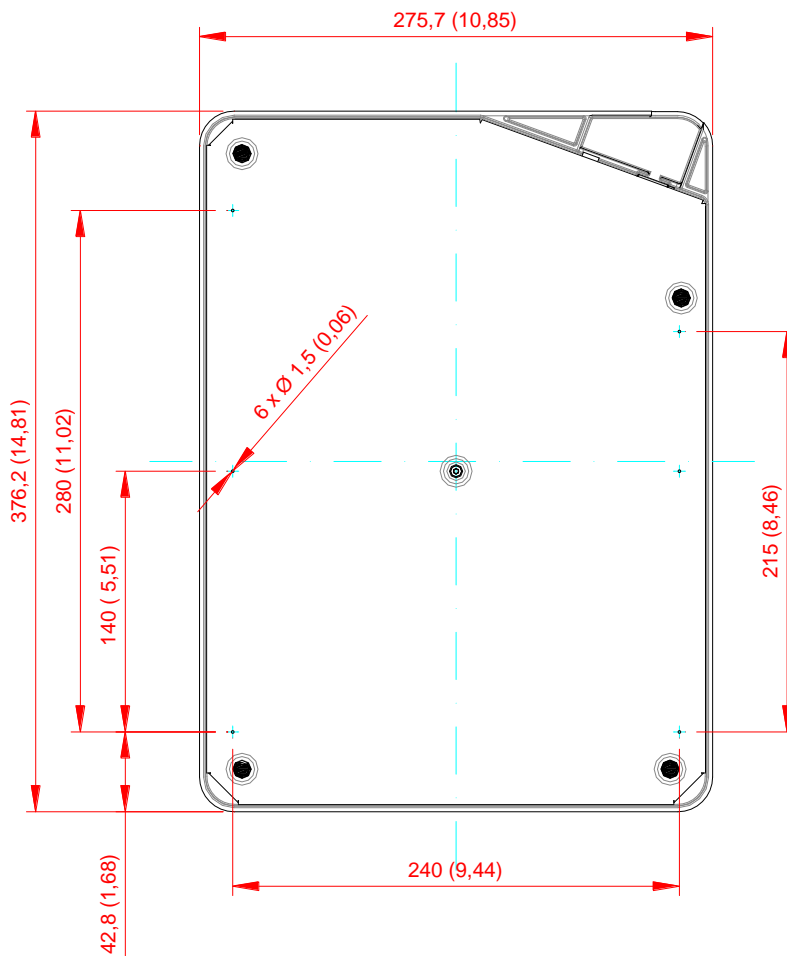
Dimensions of the antenna and positions of mounting holes (backside)
